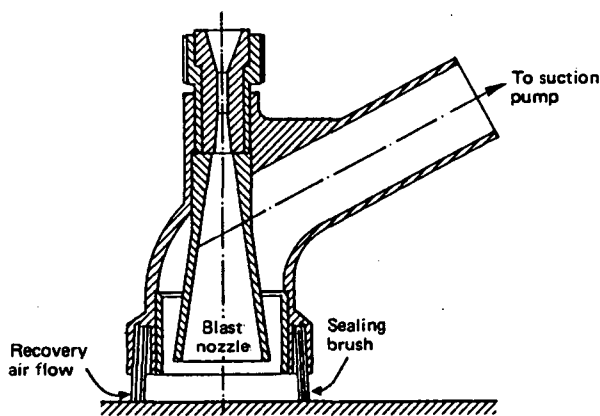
Abrasive jet blast gun with sealing arrangement.
